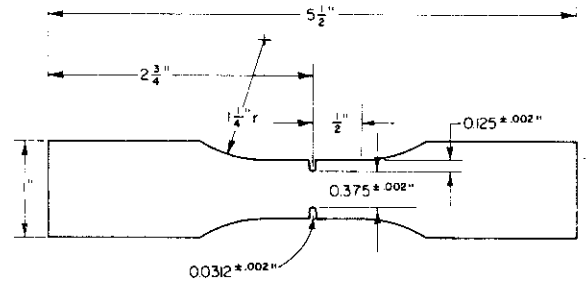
NOTCHED SHEET FATIGUE SPECIMEN
